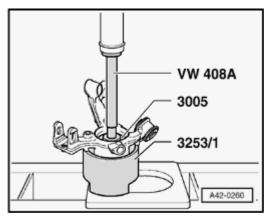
Pressing Wheel Bearing Out Of Wheel Bearing Housing Courtesy of VOLKSWAGEN UNITED STATES, INC.
